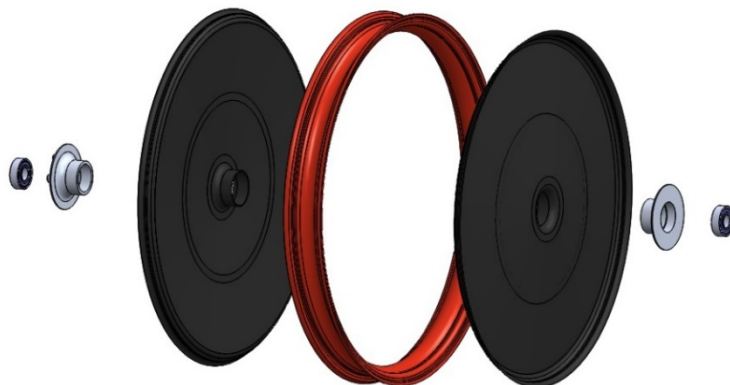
Exploded view of the assembly. The two sidewalls in black, and the contour in red. The hub is divided into two parts in order to mount the assembly, the bearings are also represented.
